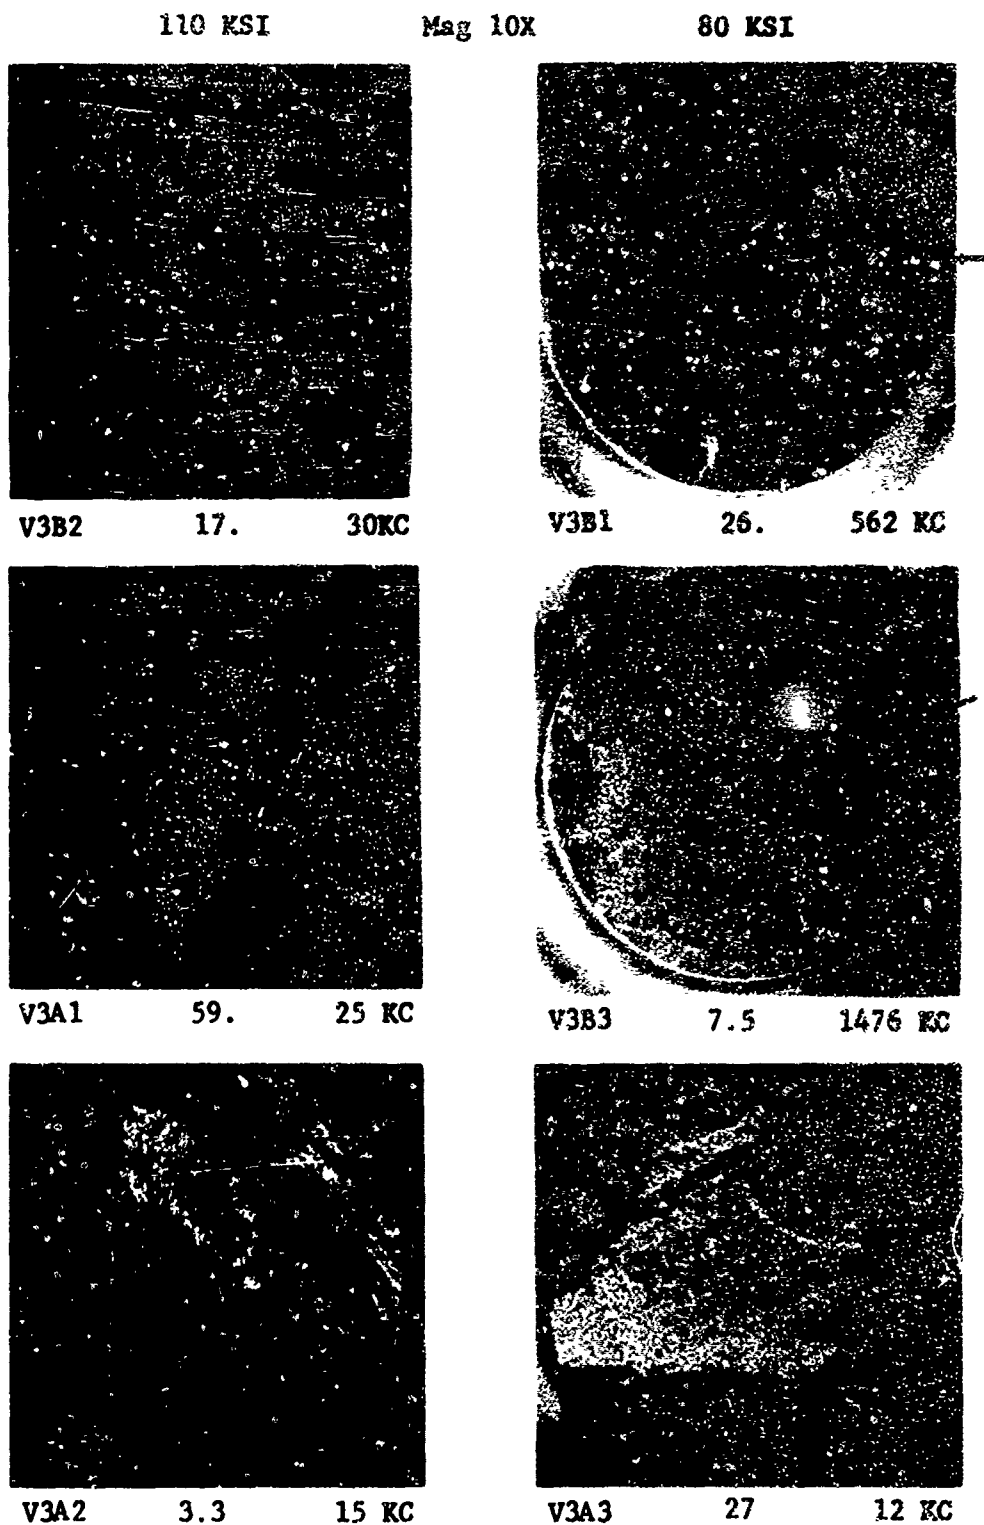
Fracture Surfaces of Failed Fatigue Specimens Series V3-
